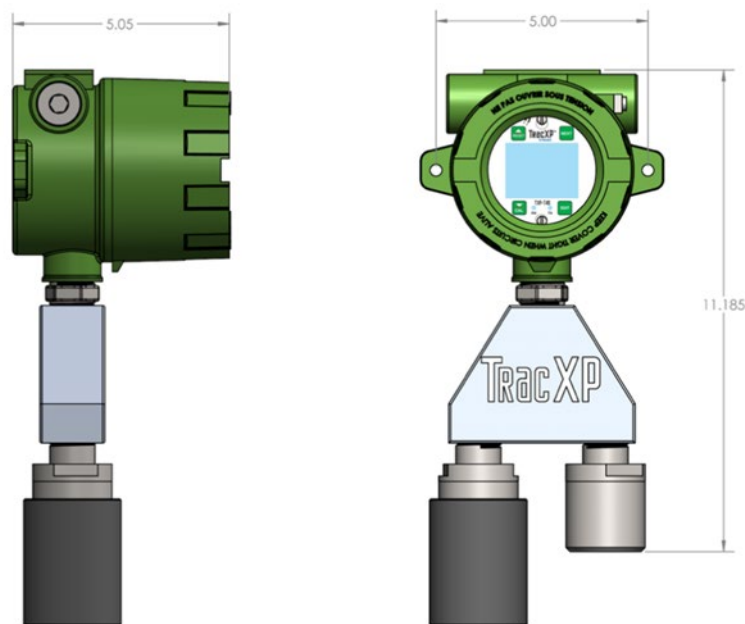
TXP-T20/T30 Explosion-Proof Housing with Dual Sensor Head Adaptor
